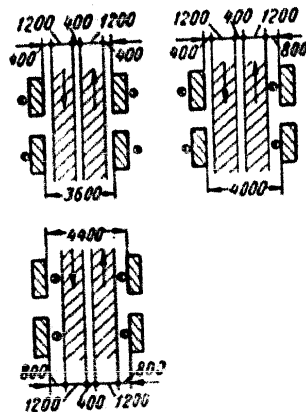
Clearance between Machine Tools for Two-Way Movement of Electric Trolleys
